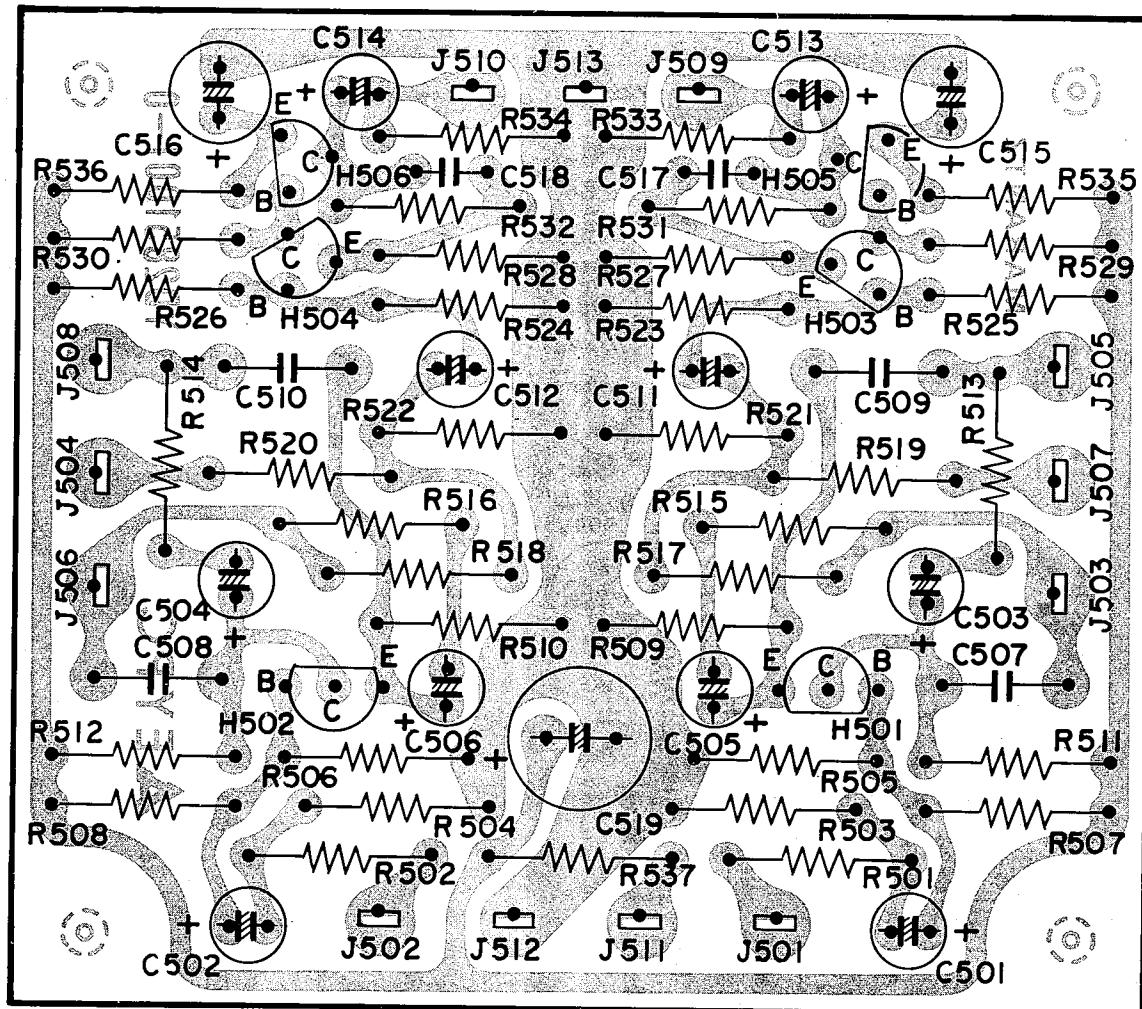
Vari-Matrix Unit Assembly P500 Component Locations
